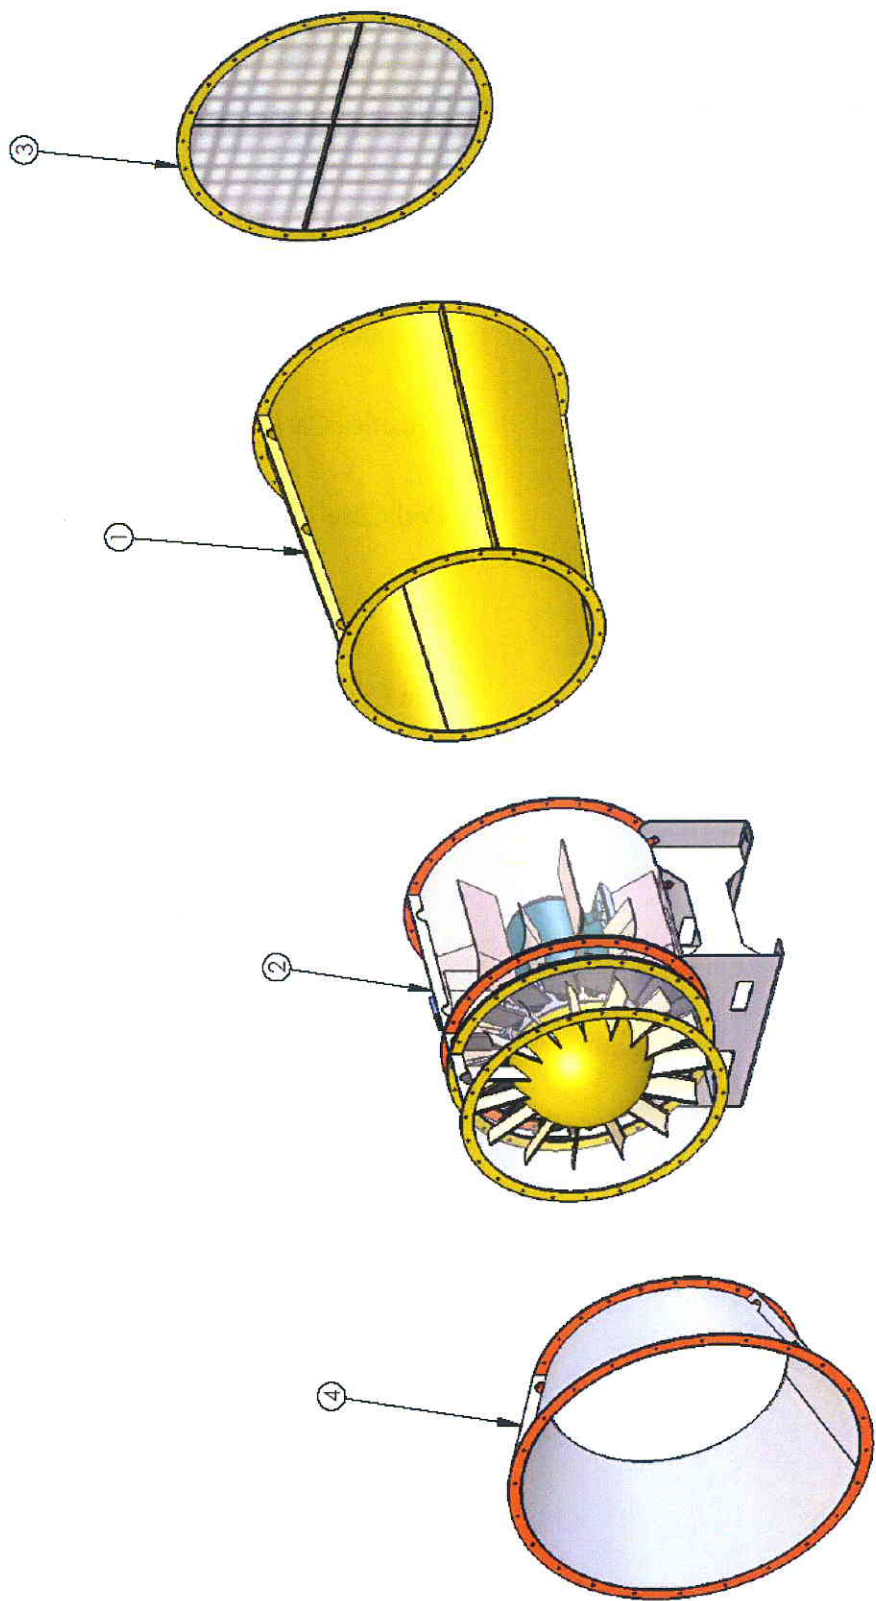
FAN ASSEMBLY DRAWING W/ACCESSORIES
